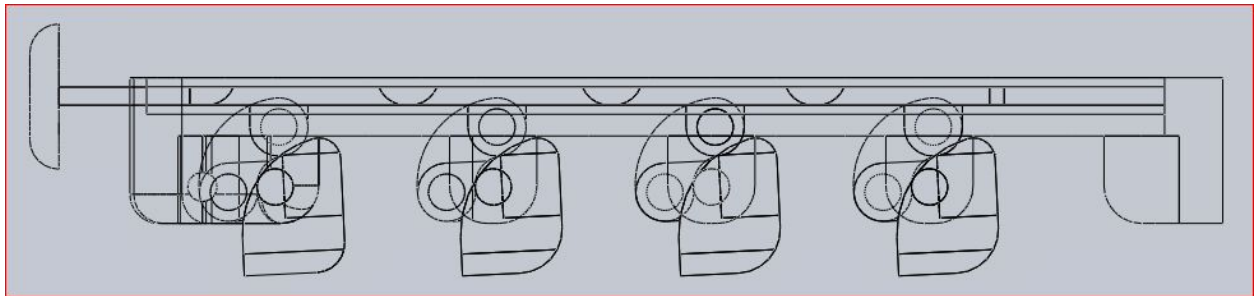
Wireframe of movement bar and linkage assembly, side view, base plate not shown
